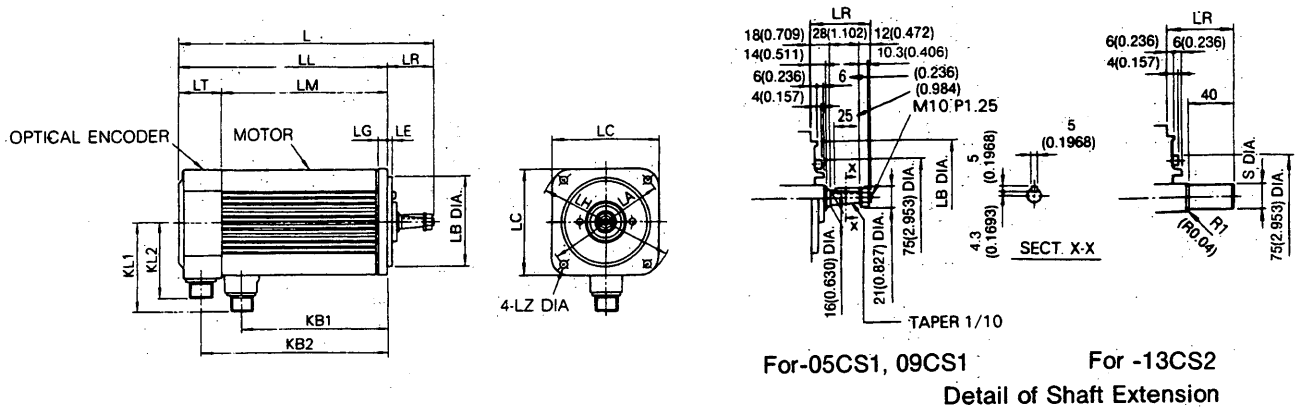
USAFED-02CS1,-03CS1 (Taper Shaft)
